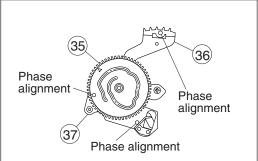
(b) Removing the Centering Arm Assembly ③
